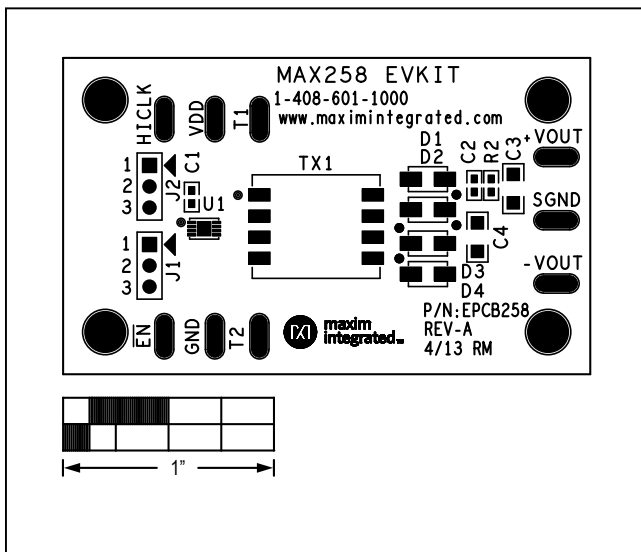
MAX258 EV Kit Component Placement Guide—Component Side
